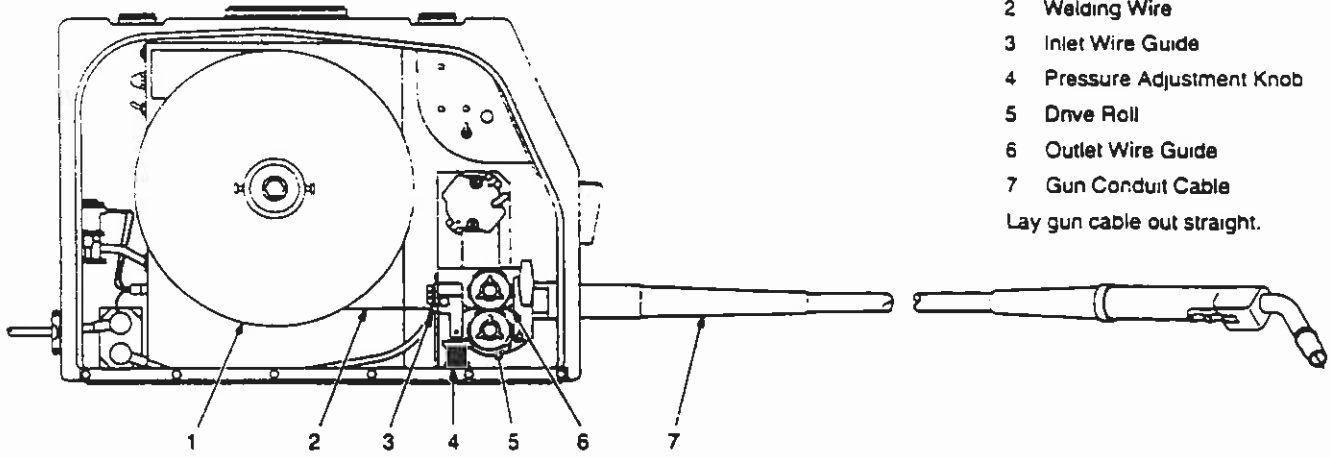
Installing Welding Wire And Adjusting Hub Tension
